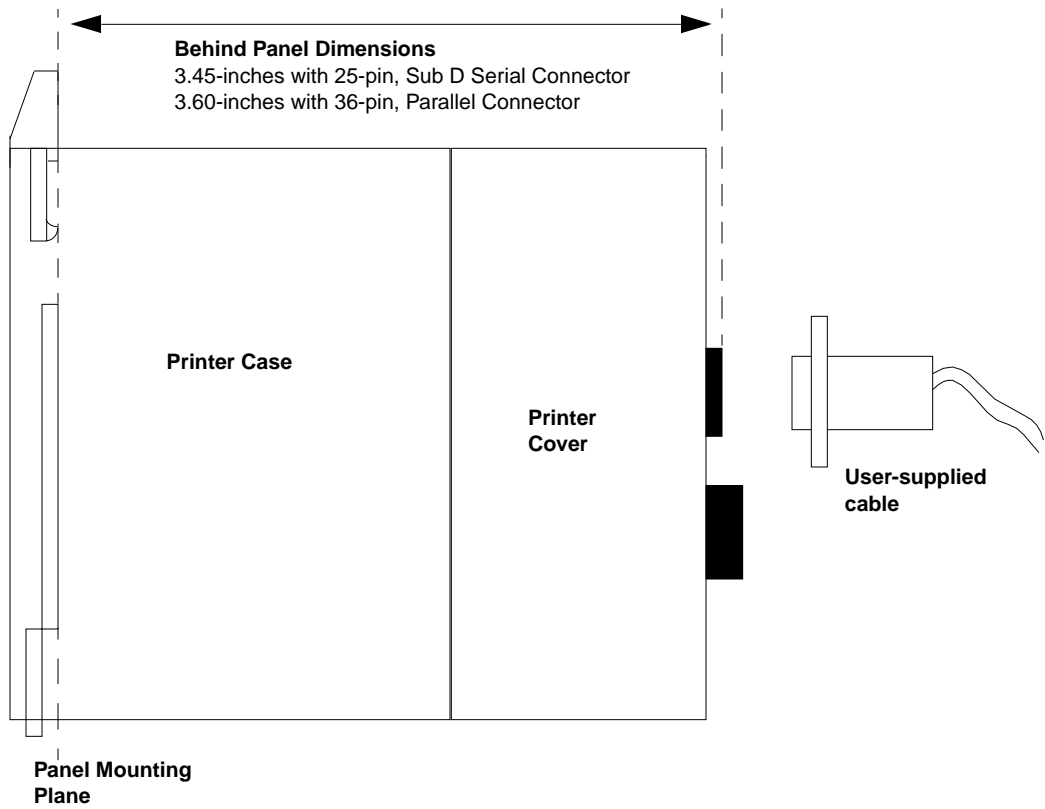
Printer Dimensions (Side View with Rear Cover)
